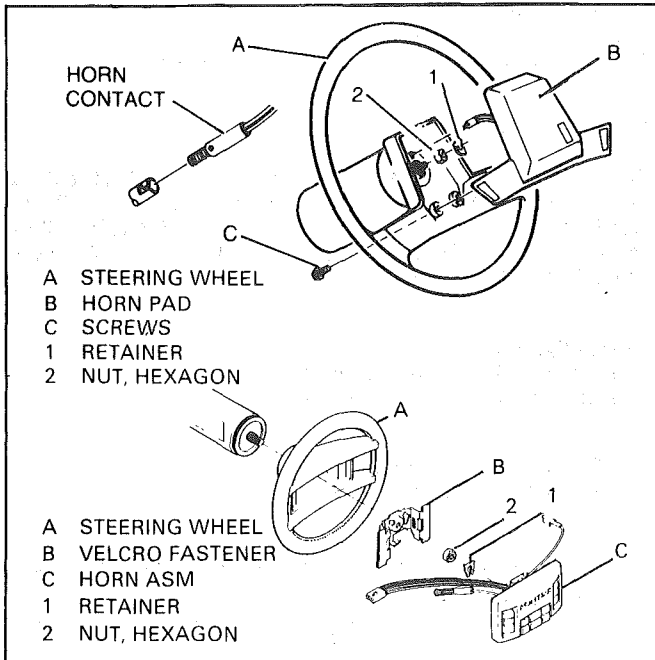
Removing Horn Pad, Retainer, and Jam Nut
